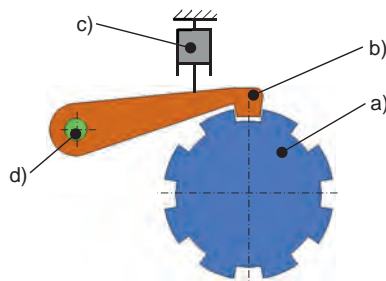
Schematic illustration of a parking lock; a) parking lock wheel, b) pawl, c) actuator, d) pivot connecting the pawl to the gearbox housing
